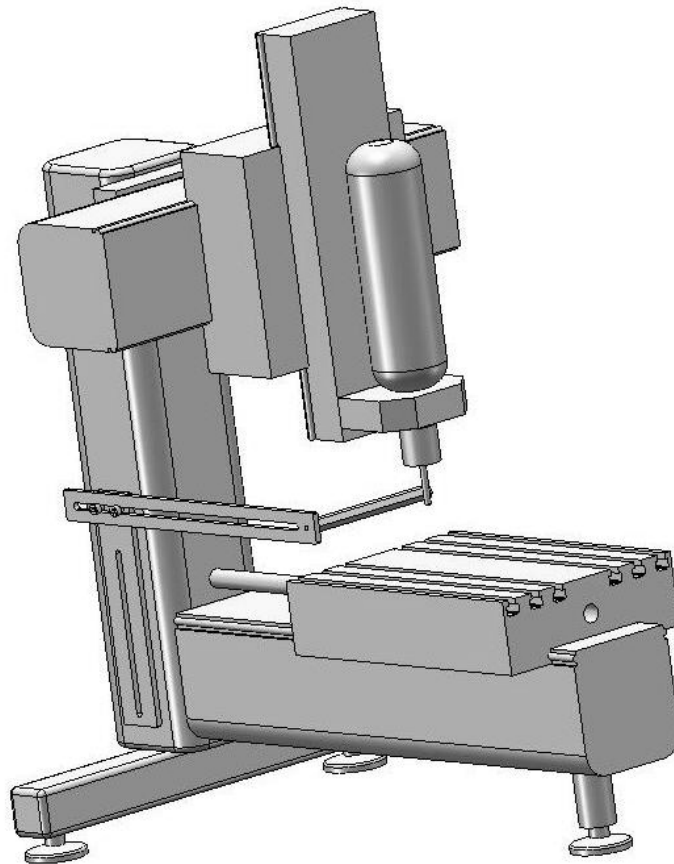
CAD model of LAKOS 150G desktop milling machine.
